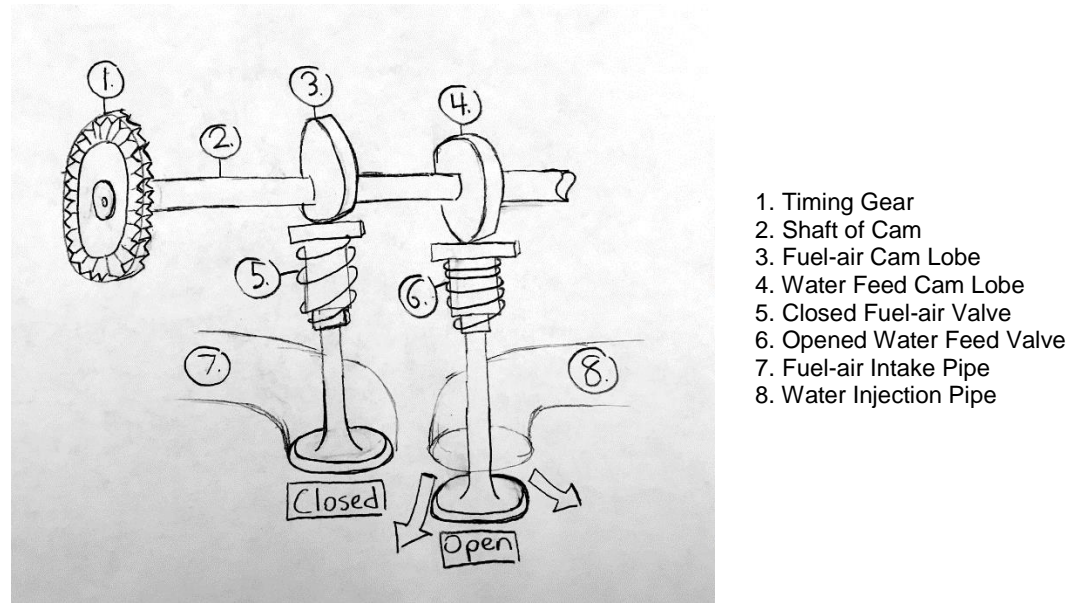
Camshaft, Valve, and Timing Gear Interconnection Diagram
